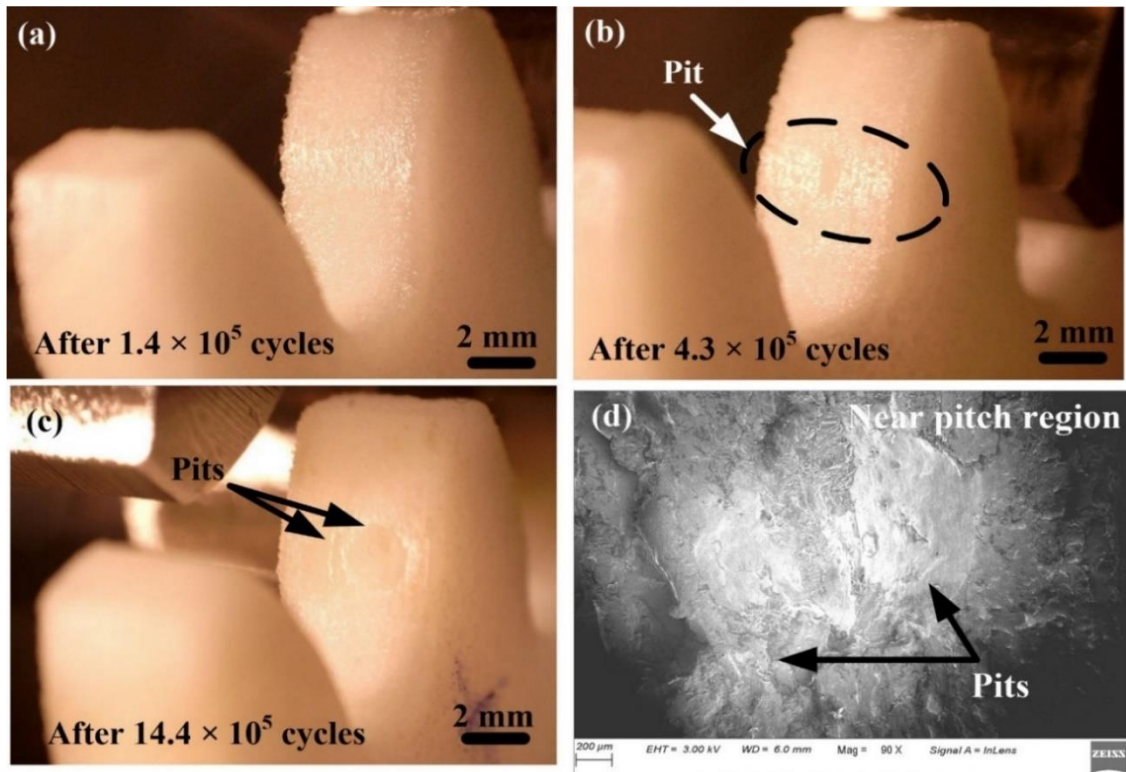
(a–d) Worn-out gear tooth surface at 1.8 Nm under lubricated conditions
